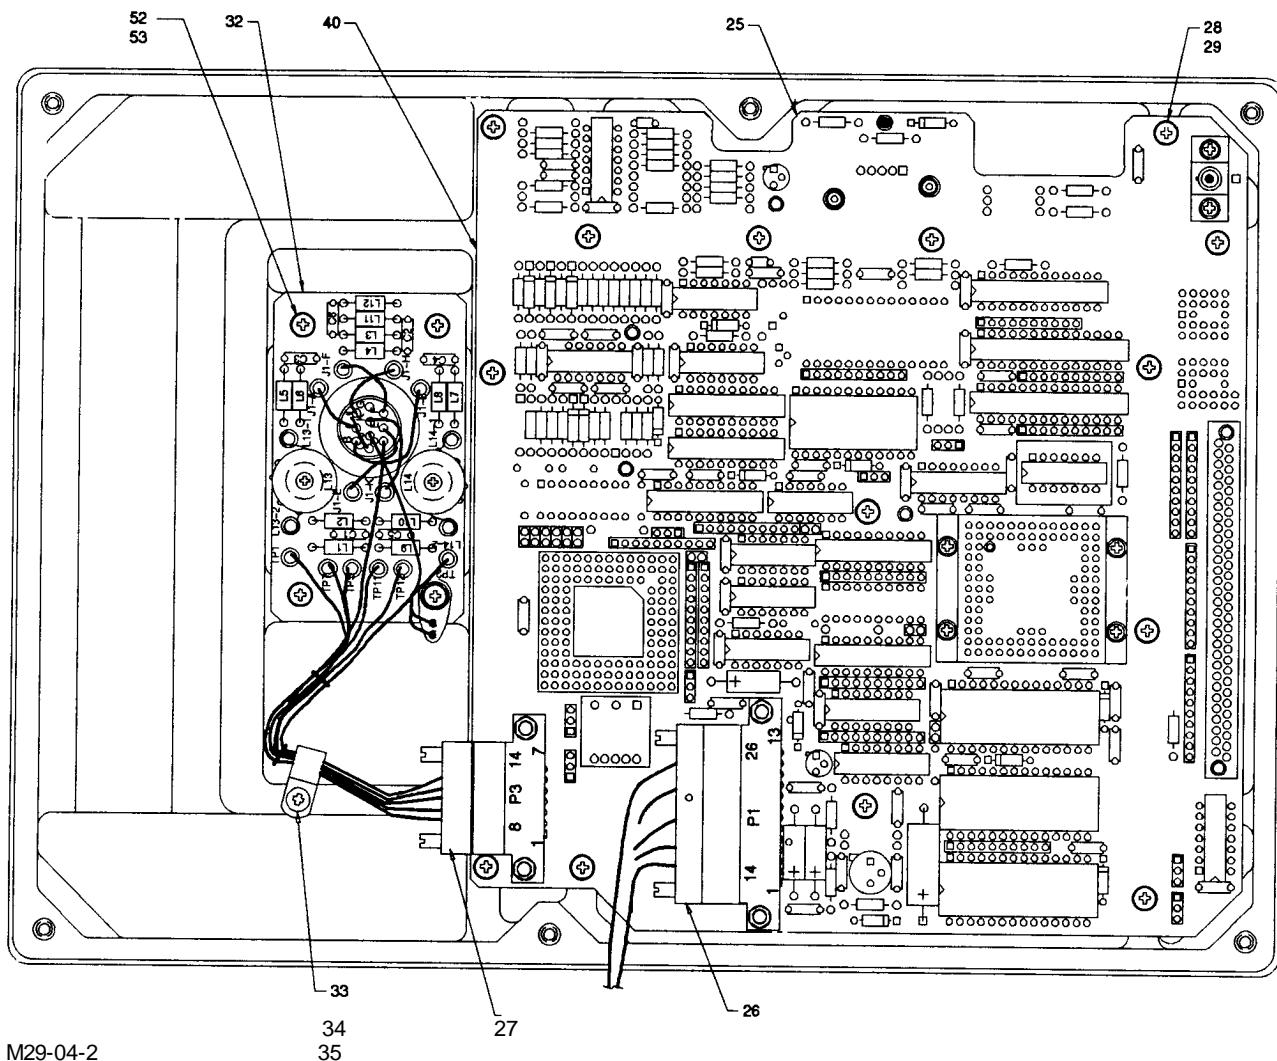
Transceiver Assembly AY6707292-2 (Sheet 1 of 3)
